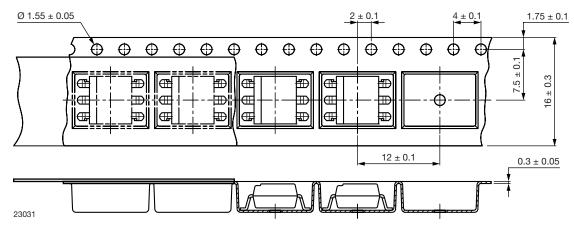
Tape and Reel Packaging (1000 pieces on reel)
